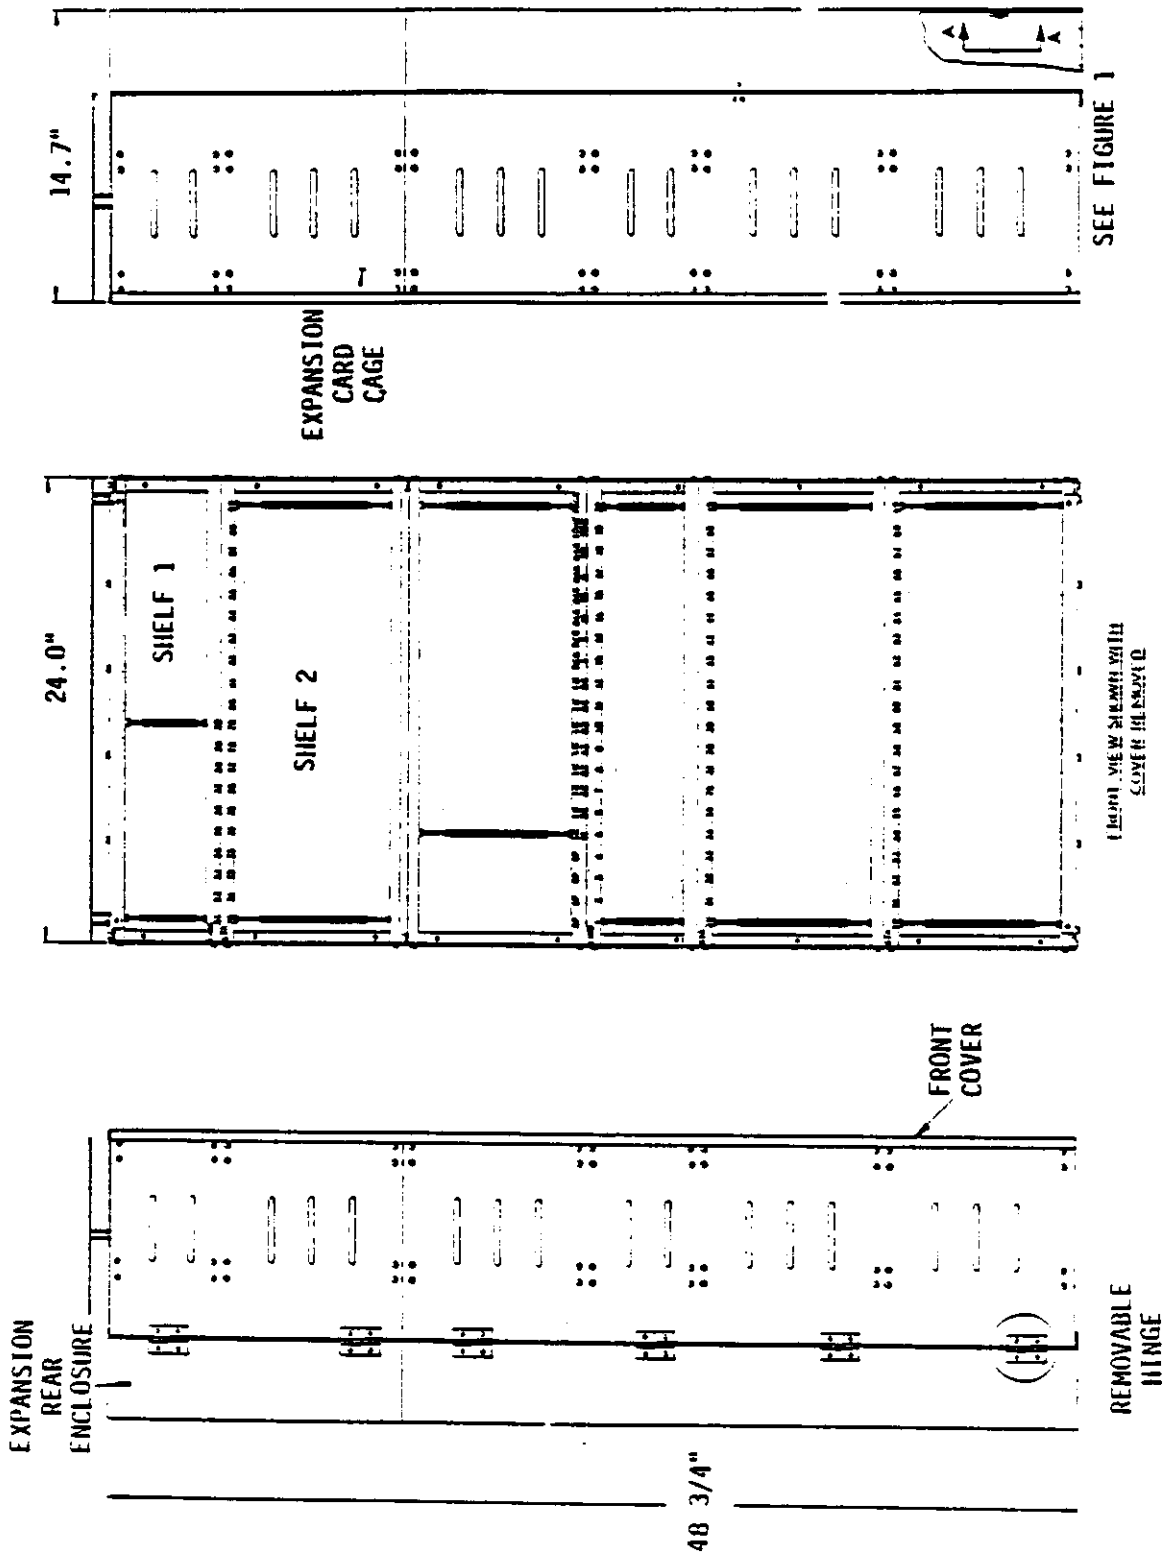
EK-3060 KSU Cabinet Layout and Dimensions
